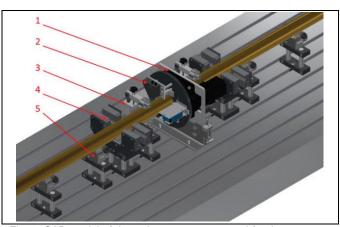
CAD model of the rod measurement stand for the purposes of flashless forging of drinking water fittings elements: 1 - drive module with indexing gear, 2 - measurement module, 3 - tip, 4 - bar feeder, 5 - steady rest
